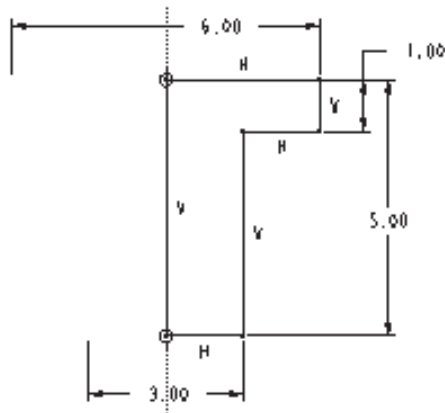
Sketch with dimensions and constraints for the counterbore hole
